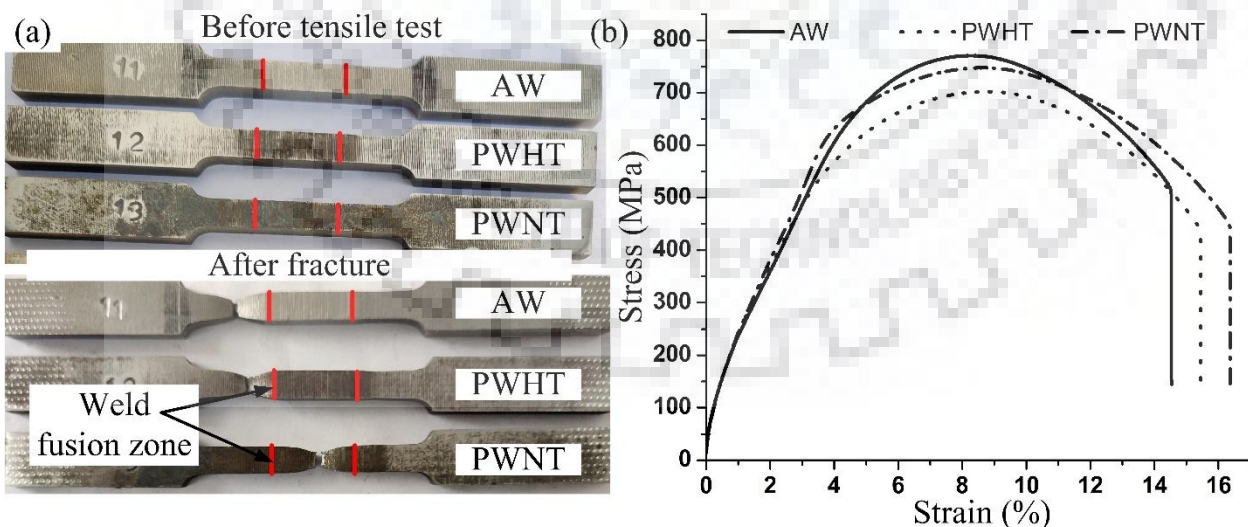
(a) Tensile specimens before and after fracture, and (b) engineering stress-strain curves for welded joints welded with different post-weld conditions
